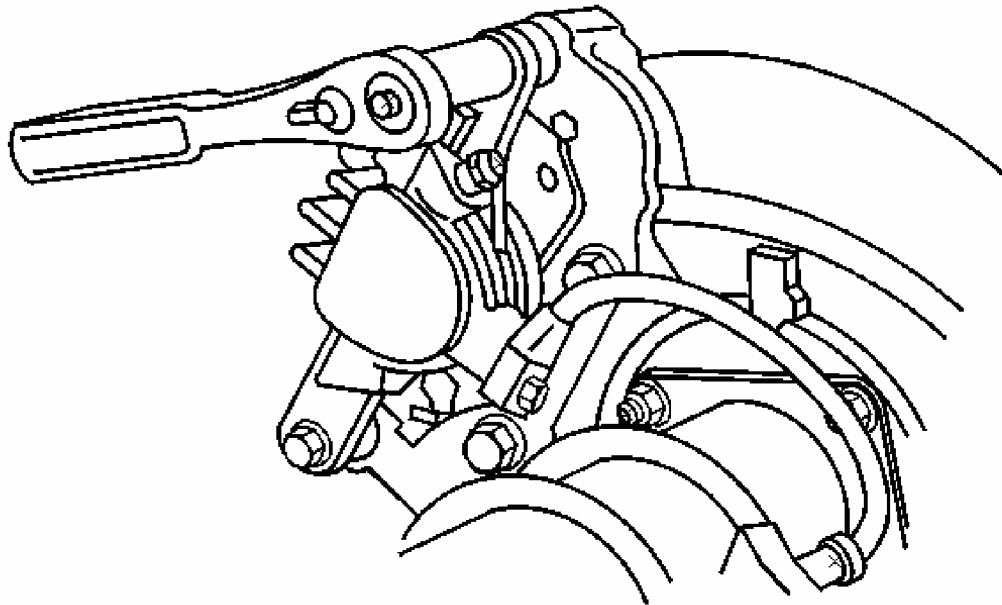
View Of Upper Brake Caliper Mounting Bolt
